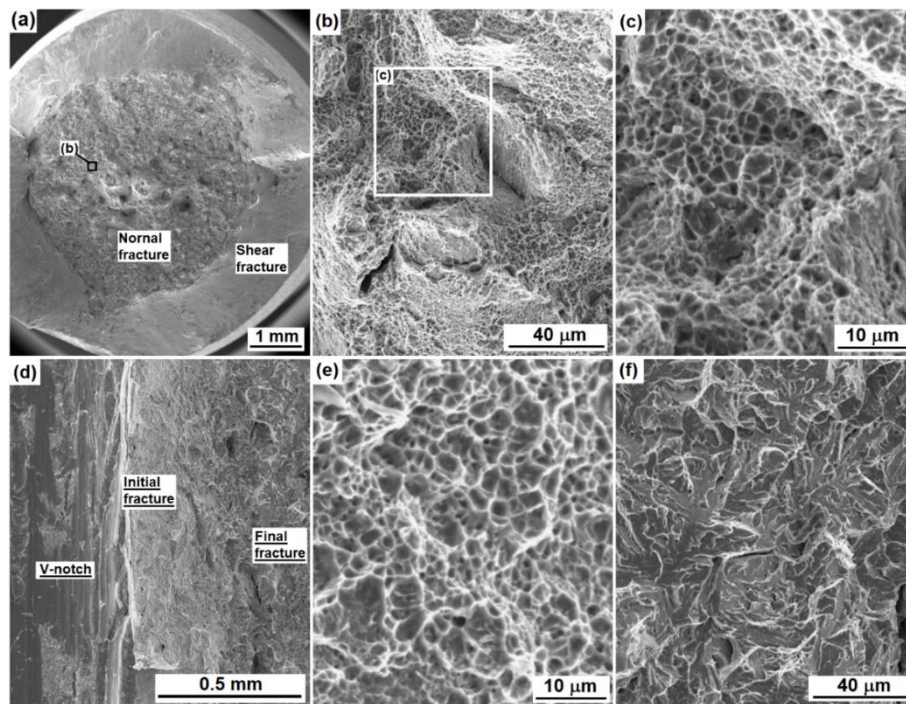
SEM fractographic analyses of tensile and impact samples: (a-c) tensile fracture at various magnifications; (d) V-notch impact fracture at low magnification; (e) voids-type ductile fracture in initial fracture area; and (f) quasi-cleavage fracture in final fracture.
